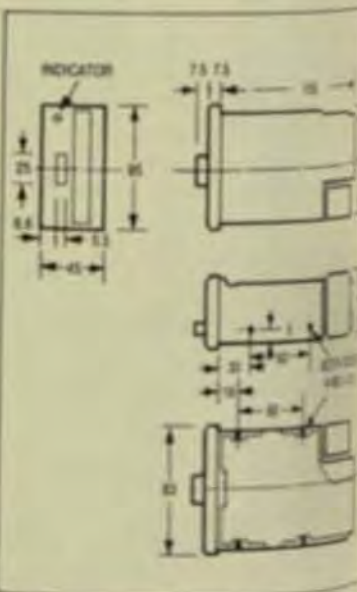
Dimensions for the 3-in. CFD drive are shown in millimeters.
